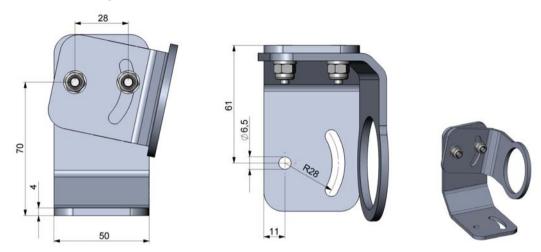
Dimensions mounting bracket, adjustable in two axes [TM-AP-CTL]
